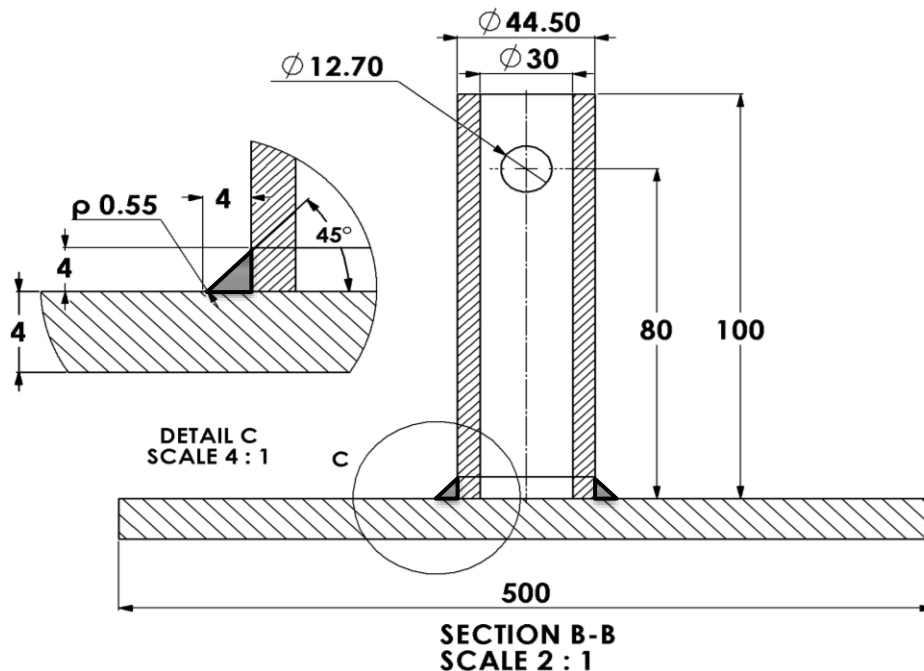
Dimensions and loading direction of tube-on-plate welded joint subjected to lateral loading
